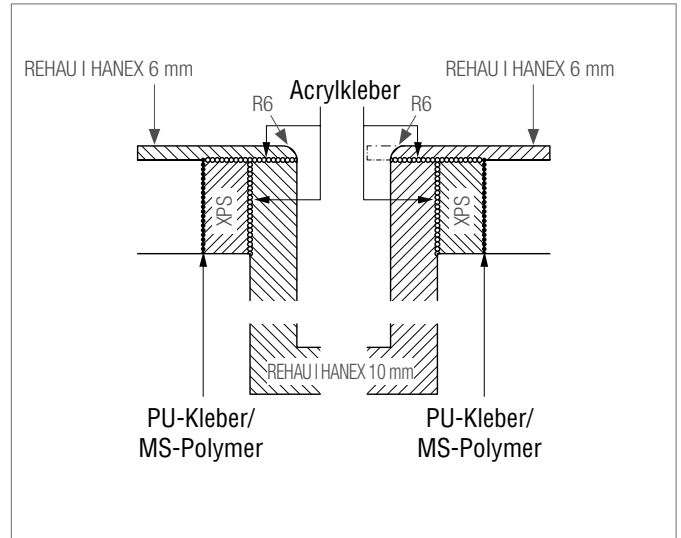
Milling the cut-out edges flush and applying a radius
